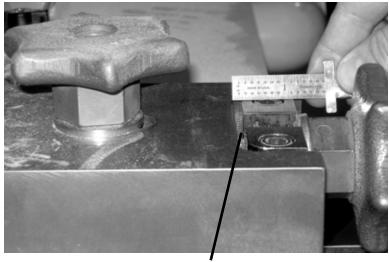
Install the right clamp block on the blade and snug the clamp knob.
